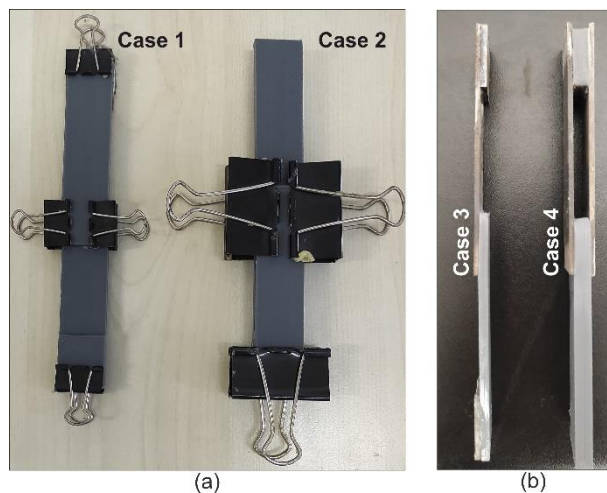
Produced specimens a) adhesive bonded and b) induction welded
